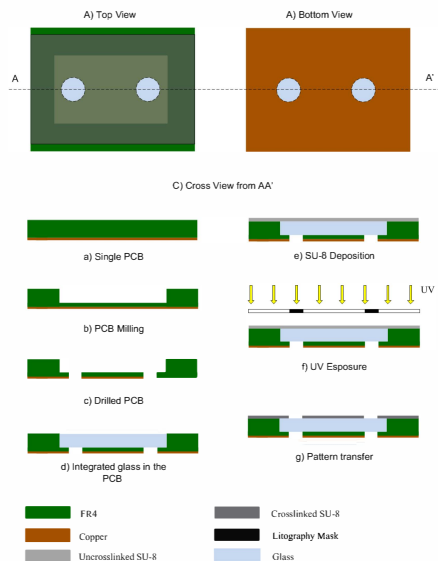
A) Top view and B) Bottom view of the microfluidic PCB. C) Fabrication process from cross view AA'.
